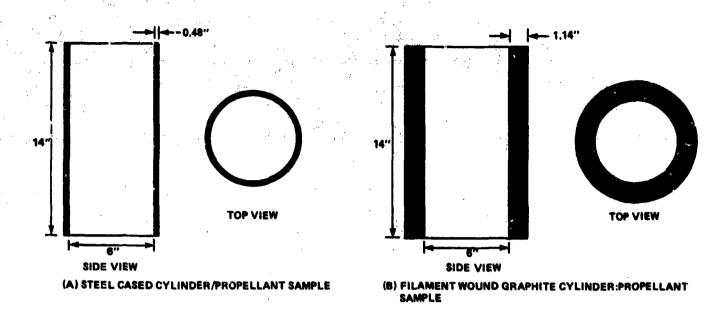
CYLINDRICAL SAMPLE DIMENSIONS
